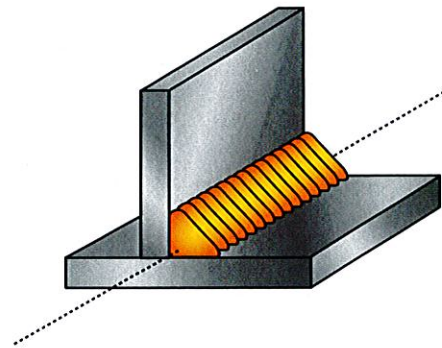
A Groove Weld (Single Bevel) with a Fillet Weld Adding Additional Reinforcement on a T-Joint.
